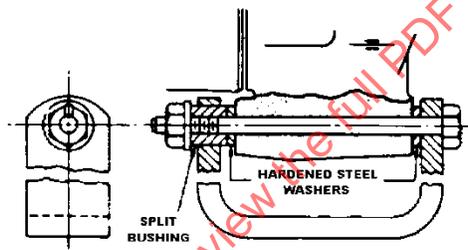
Typical installation of split bushing in bracket for spool mounting
